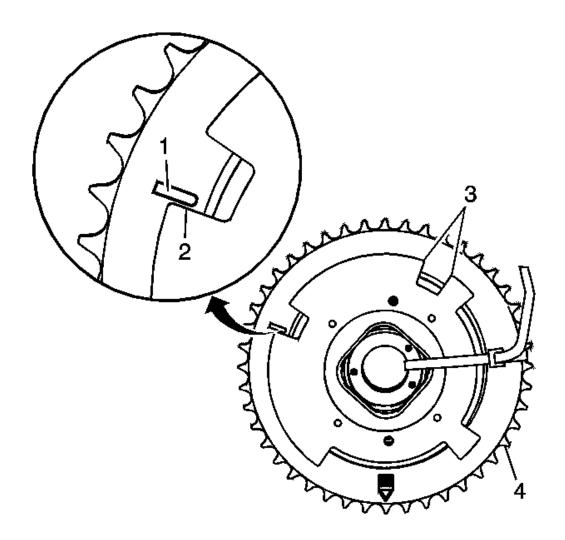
CMP Actuator Inspection Points Courtesy of GENERAL MOTORS CORP.
